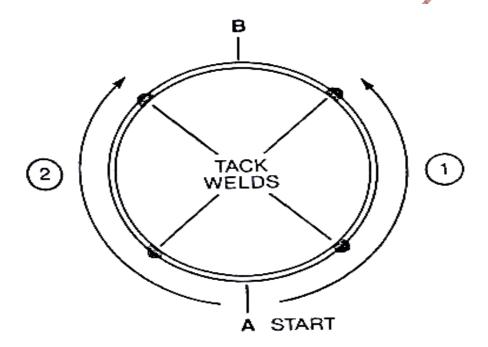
Welding sequence for vertical-up pipe welding. Two welders often work on opposite sides of pipe, starting at (A) and finishing at (B), when marking large-diameter pipe. This helps balance welding stresses.
